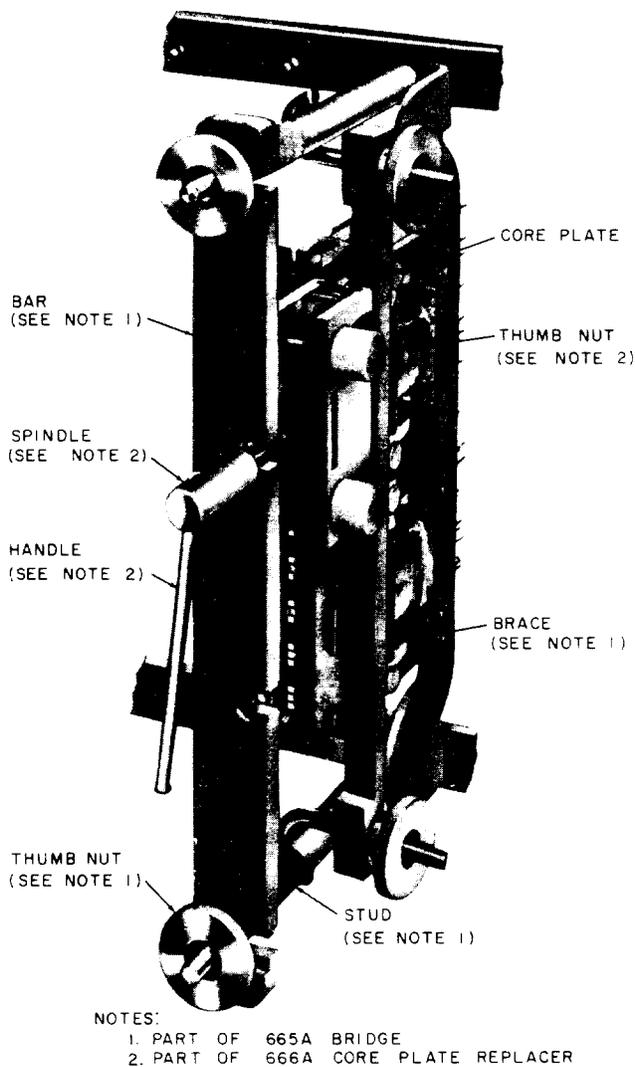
287- and 288-Type Relays Mounting Core Plate
